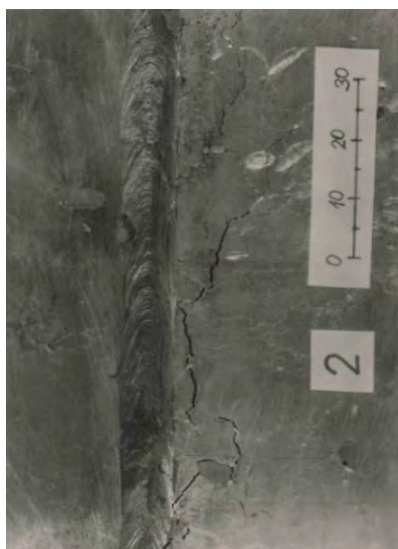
Cracks on the metal plate 2, zoomed 1.1x
